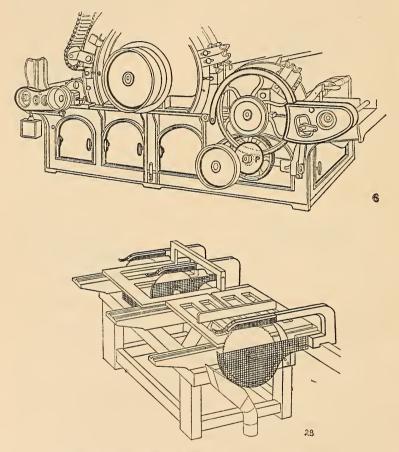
Guarded cotton carder. Fig. 28.—Guarded triple-saw, slide feed bench with clear tables.
